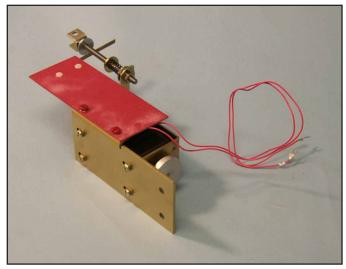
DTA Insulation Barrier Mounted to the DTA Assembly.
